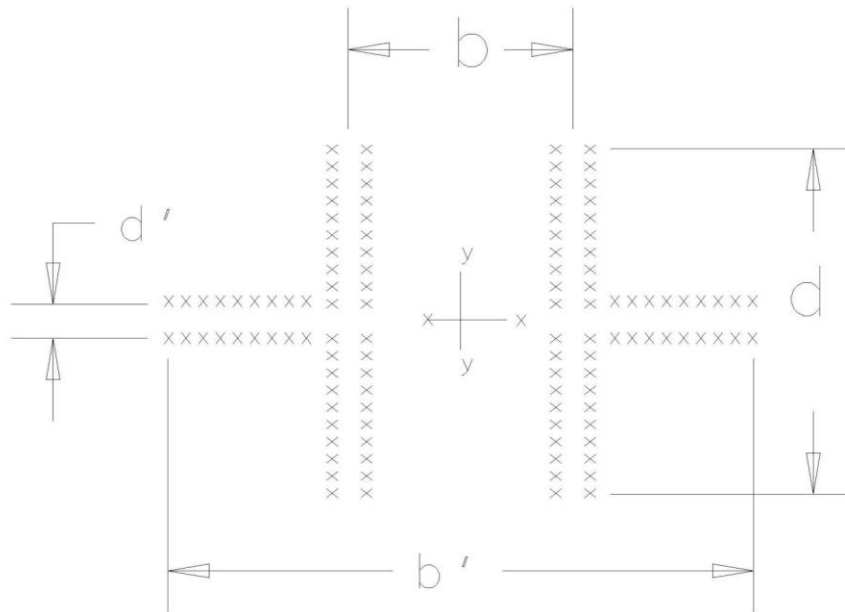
The weld configuration of the bracket @ the location 19” away from the
